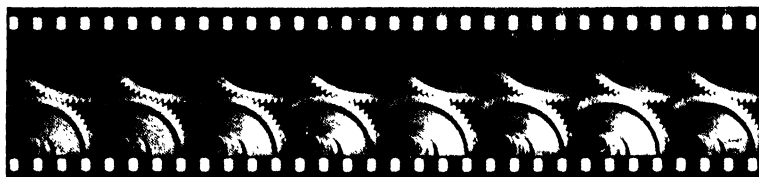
Stroboscope cinematograph film of running gear-wheels.
